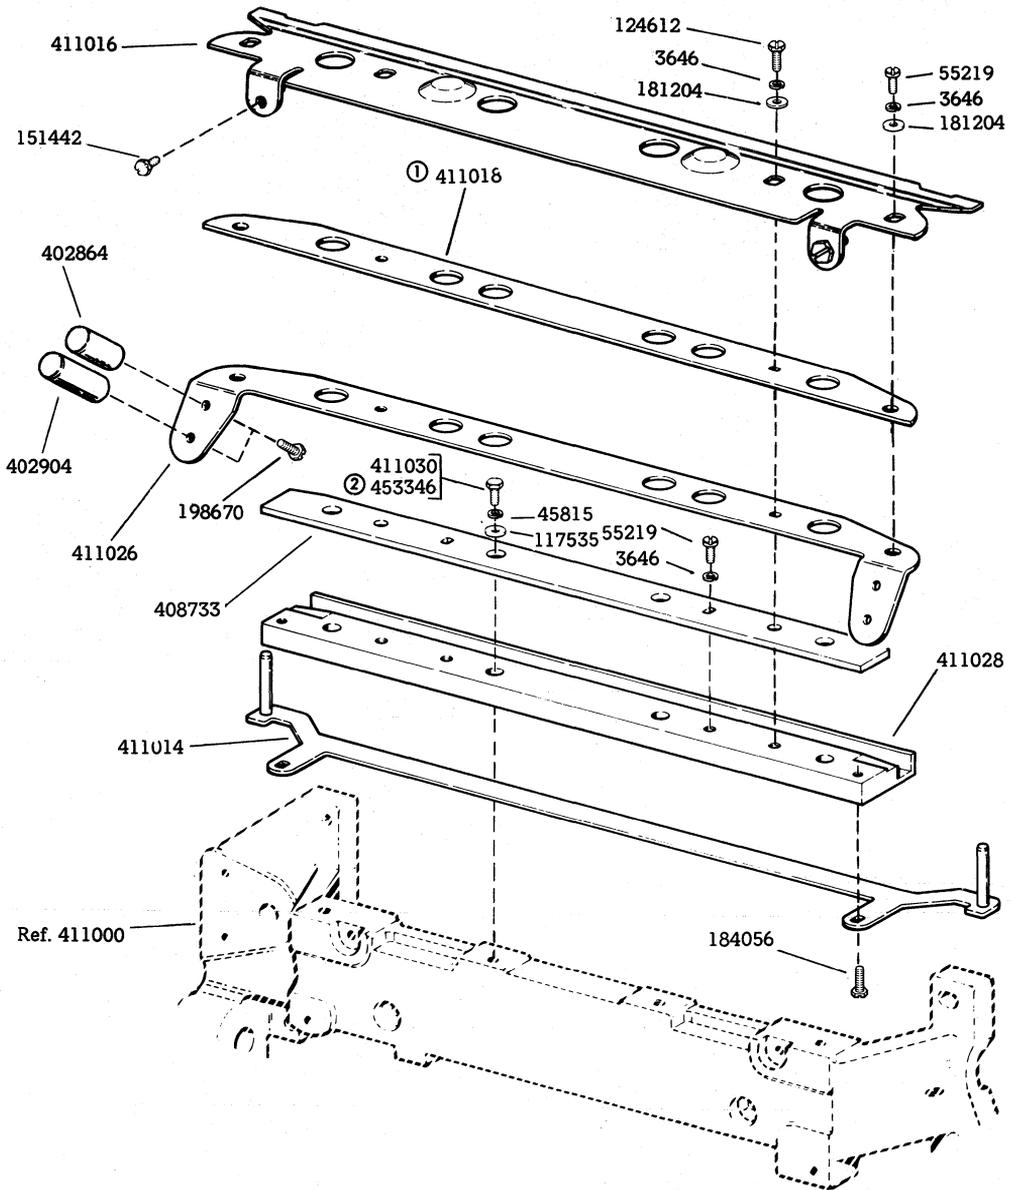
Front Plate Assembly (Tractor Feed - 132-Column)
